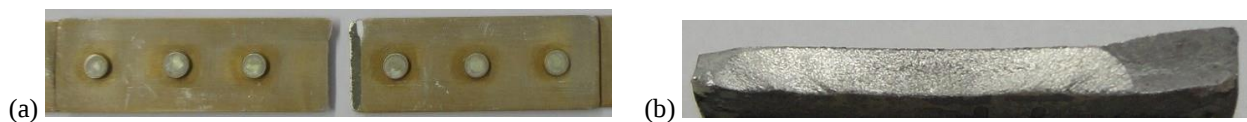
Specimen IA-10 (90 MPa): (a) fracture SP-BC; (b) fractured cross-section
